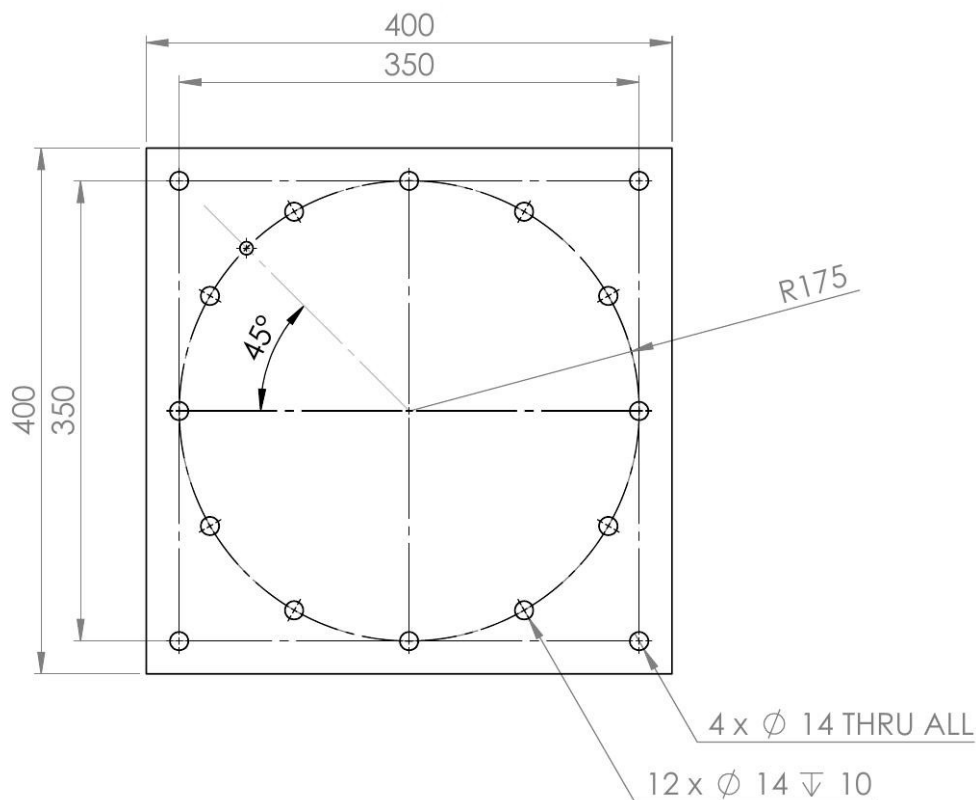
Drawing of a test plate which was laser cut from the material.
